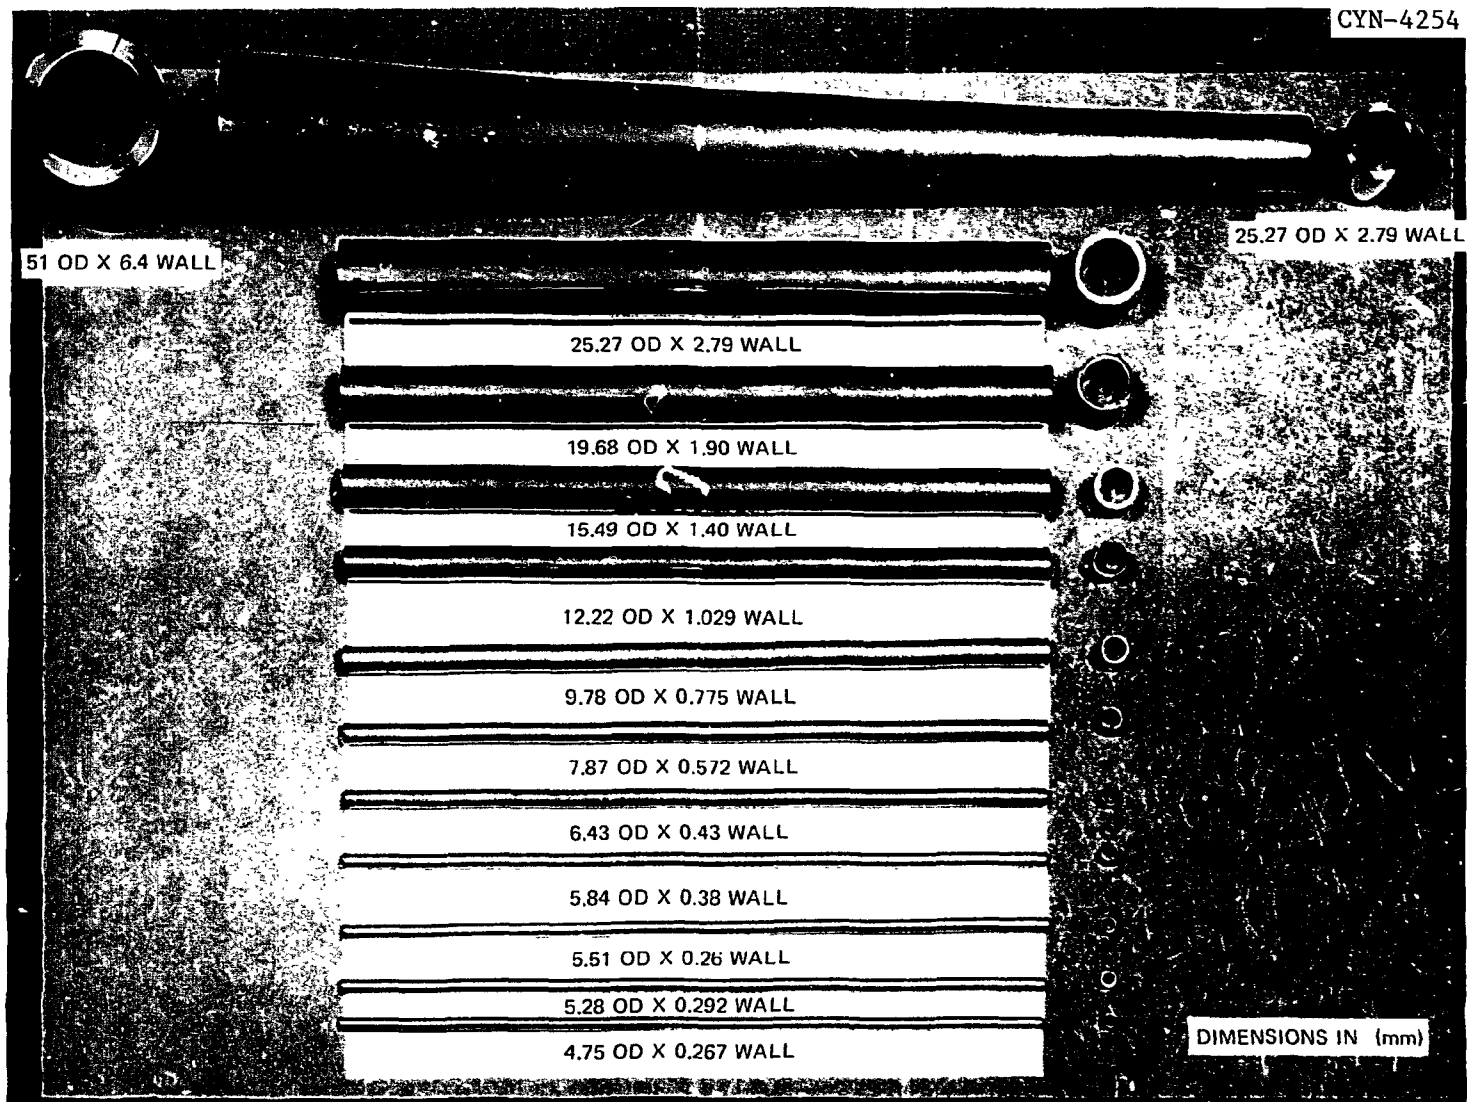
Cold-reduced and cold-drawn tubes of modified 9 Cr-1 Mo steel (heat XA3628). The sizes are given in Table 2.
